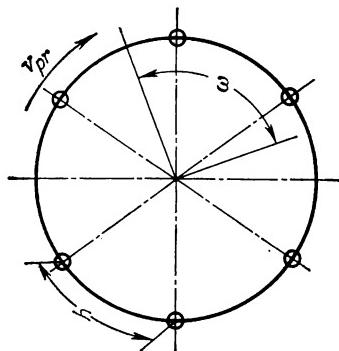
Diagram of work spindle arrangement in a rotary machine tool
